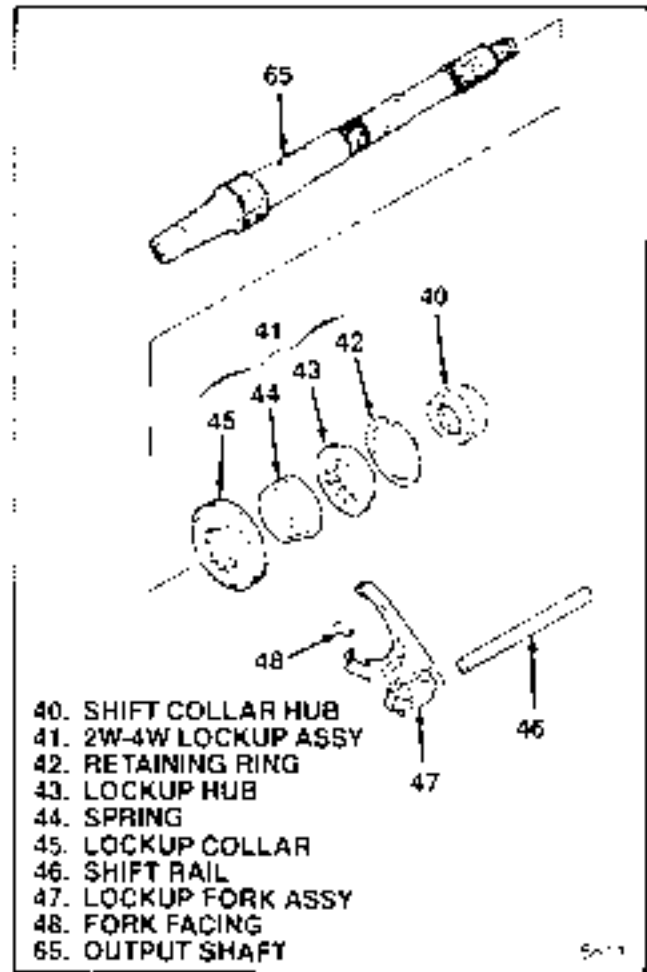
Lockup Shift Parts (Mechanical Shift)
